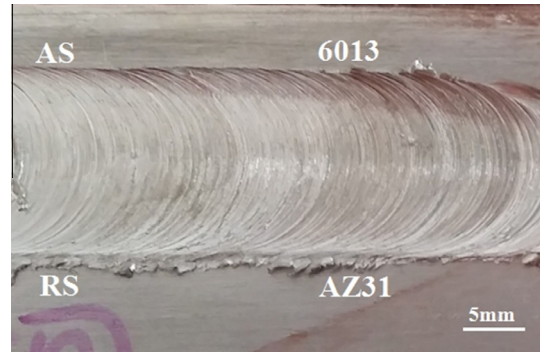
Appearance of the plates friction-stir-welded under water.
